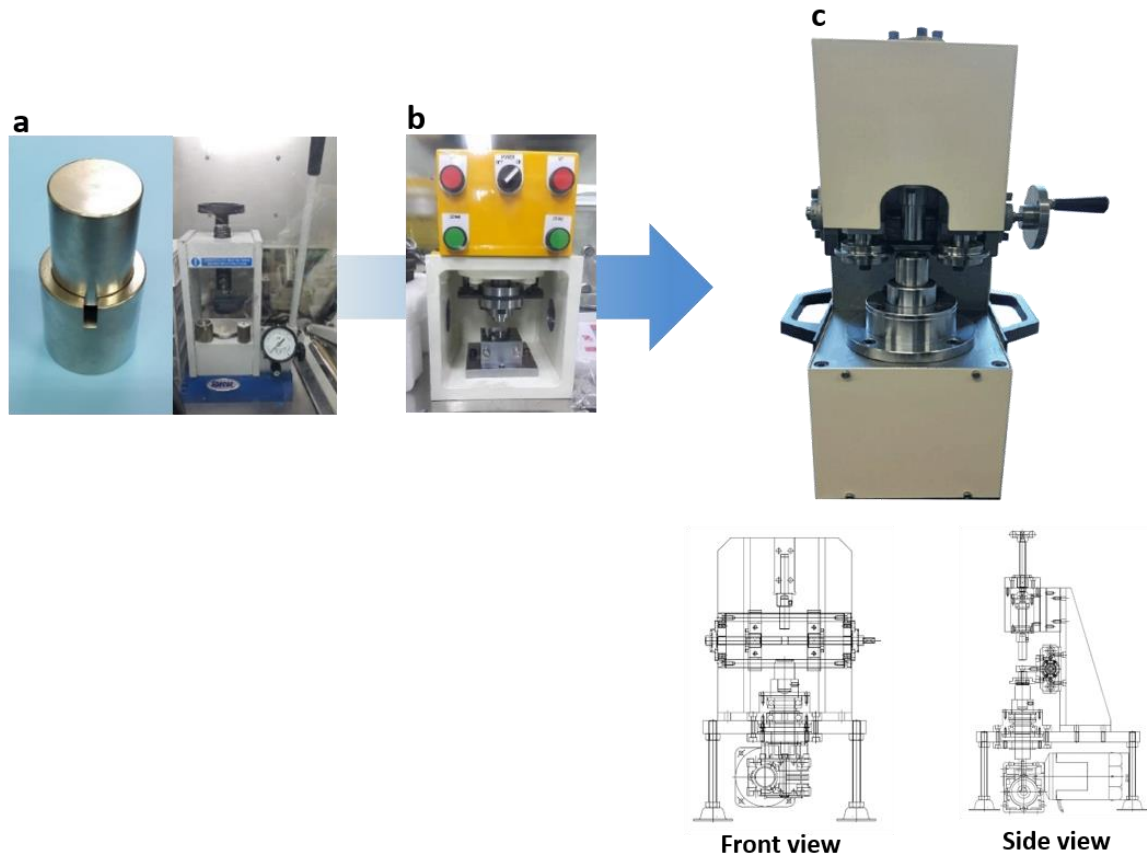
Three types of seawater coin-cell crimper. (a) Ver.1; mold and manual press type. (b) Ver.2; up and down auto press machine. (c) Ver.3; side roller method of auto crimper.
